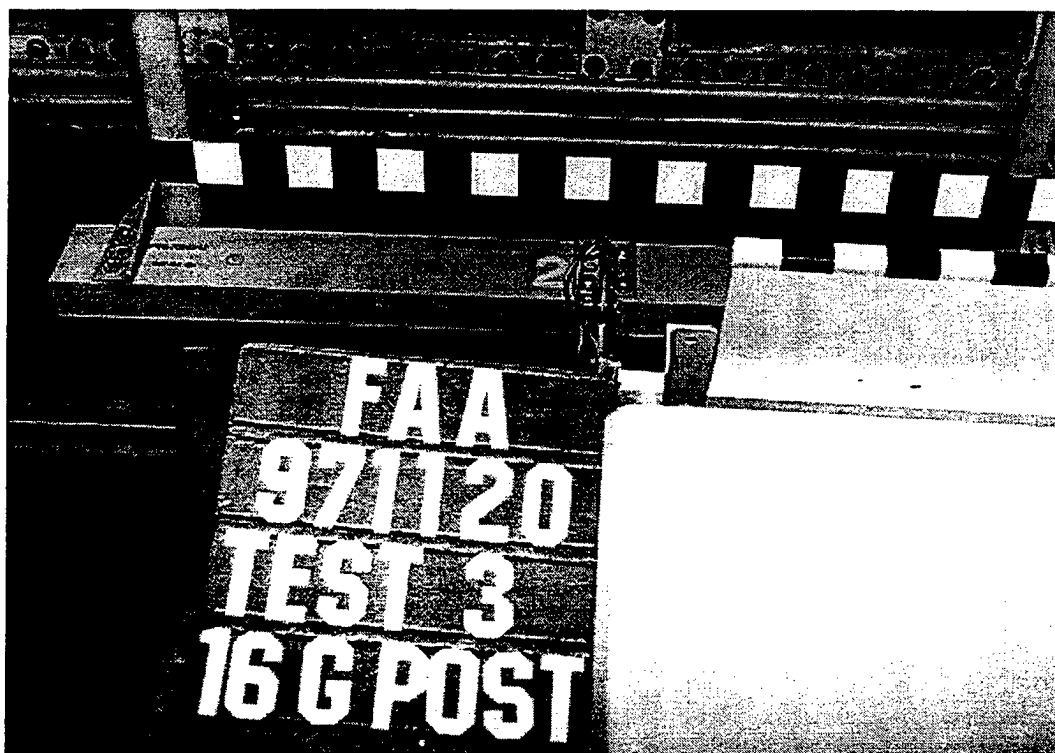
POSTTEST BIN B SUPPORT NUMBER 2 SIDE VIEW
